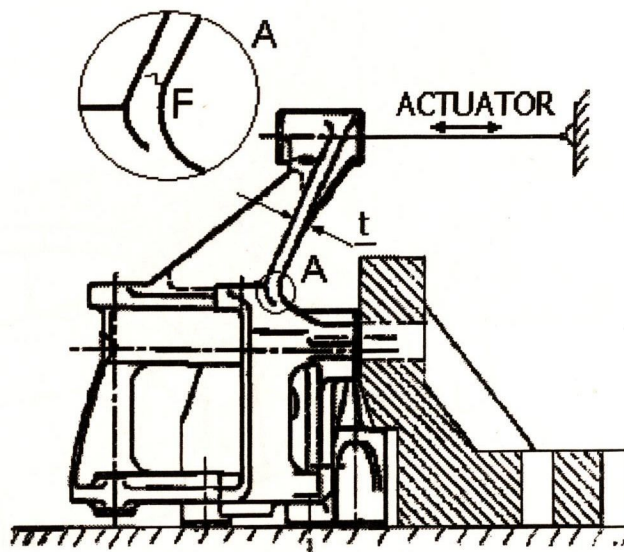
Testing condition of pump bracket; fatigue failure occurred at F.
